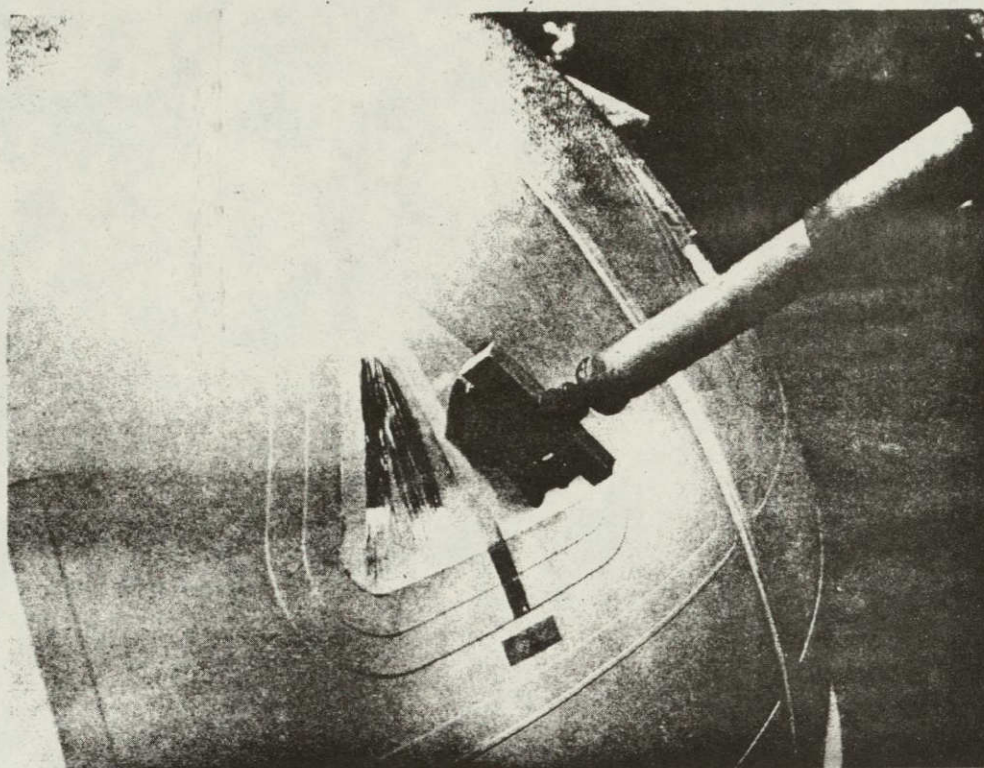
Tank support bracket prepared for weld operation.
